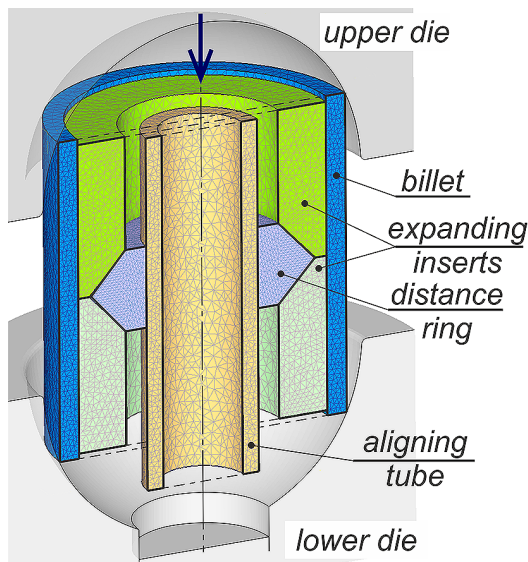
Geometric model used for finite element analysis (FEA) analysis – view of insert assembly located inside the billet and outline of dies
